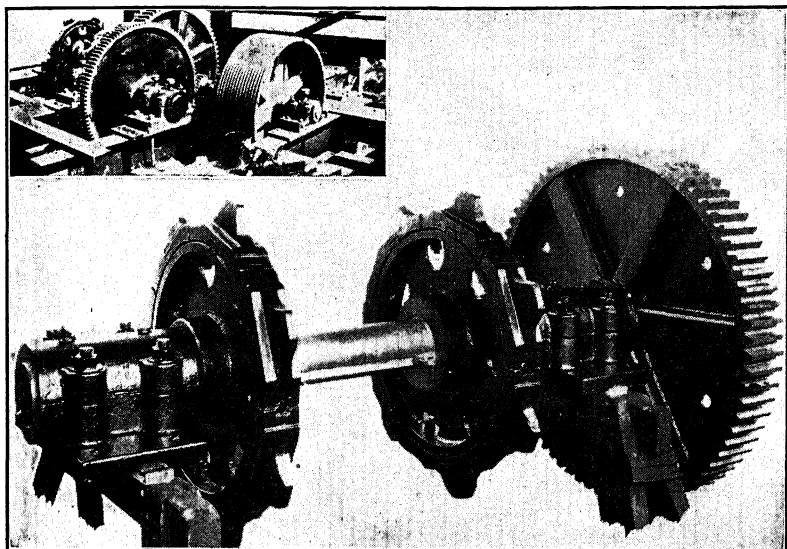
Sprockets and gear of this coal mine conveyor head shaft are of welded steel construction. The teeth are steel castings.
